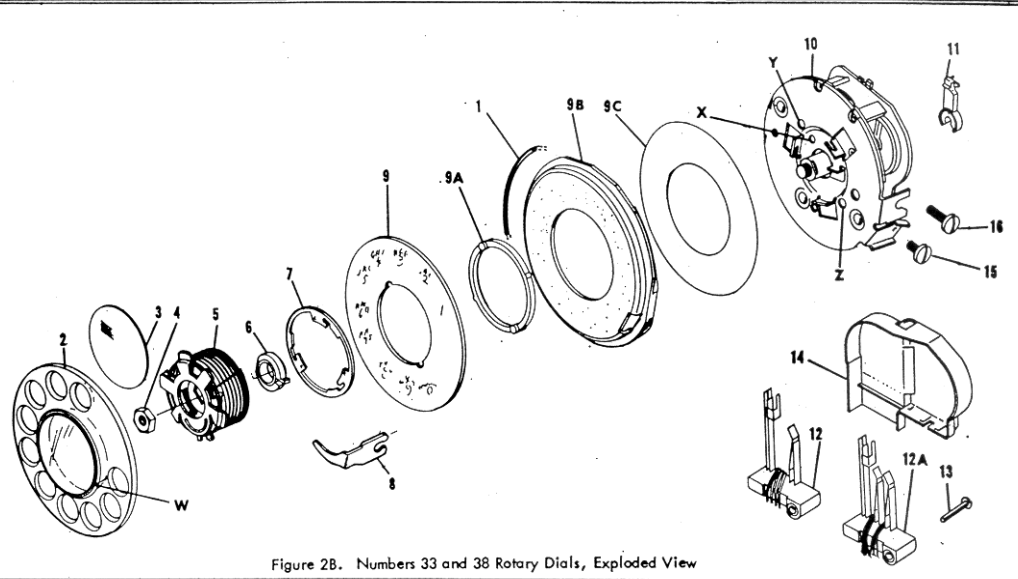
B. Numbers 33 and 38 Rotary Dials, Exploded View
